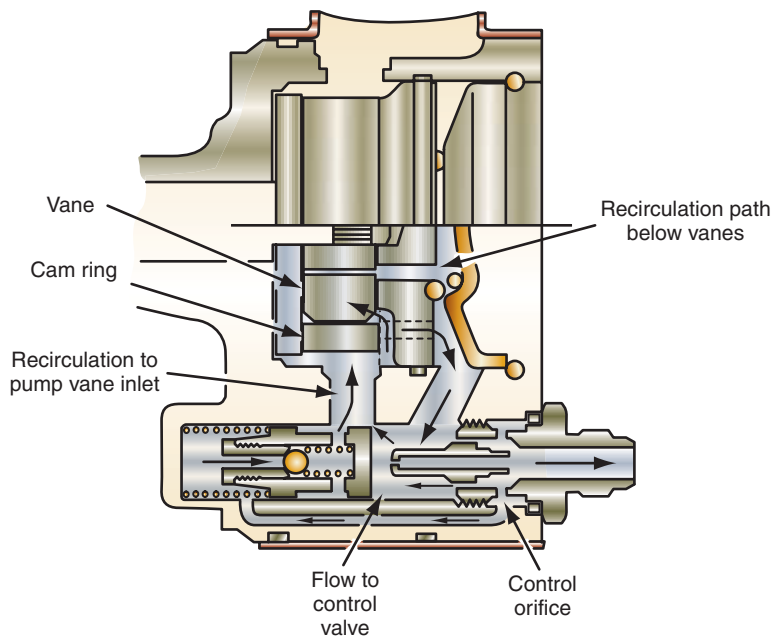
Power steering pump fluid flow to control valve and outlet fitting.
